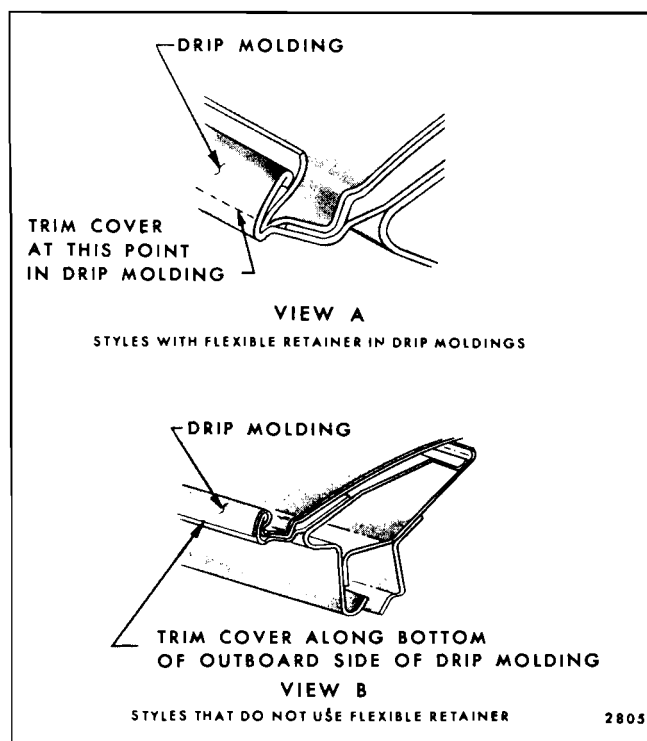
Trimming Fabric Roof Cover at Drip Molding Area
